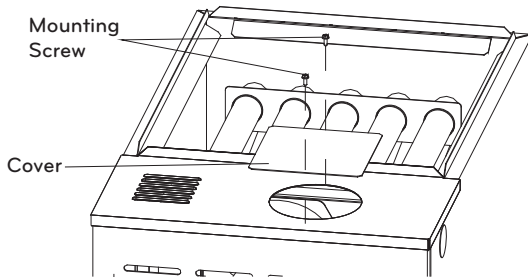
B Cover the hole in the top panel when Combustion Air Inducer is rotated
